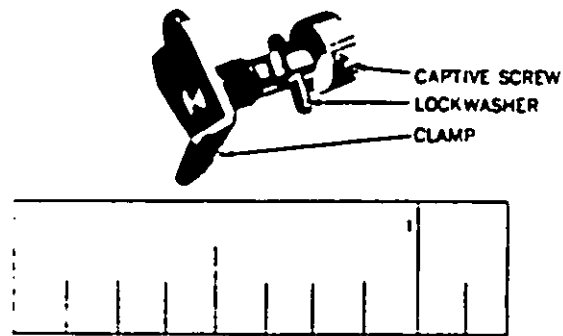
Mounting clamp assembly - MS17183 (or equal).
